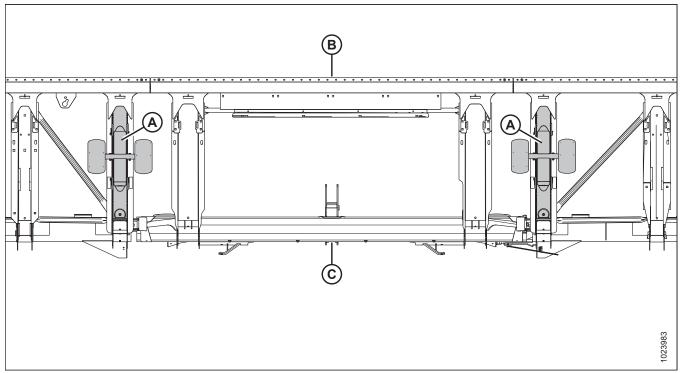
Inboard Wheel Assemblies Installed – View from Below
